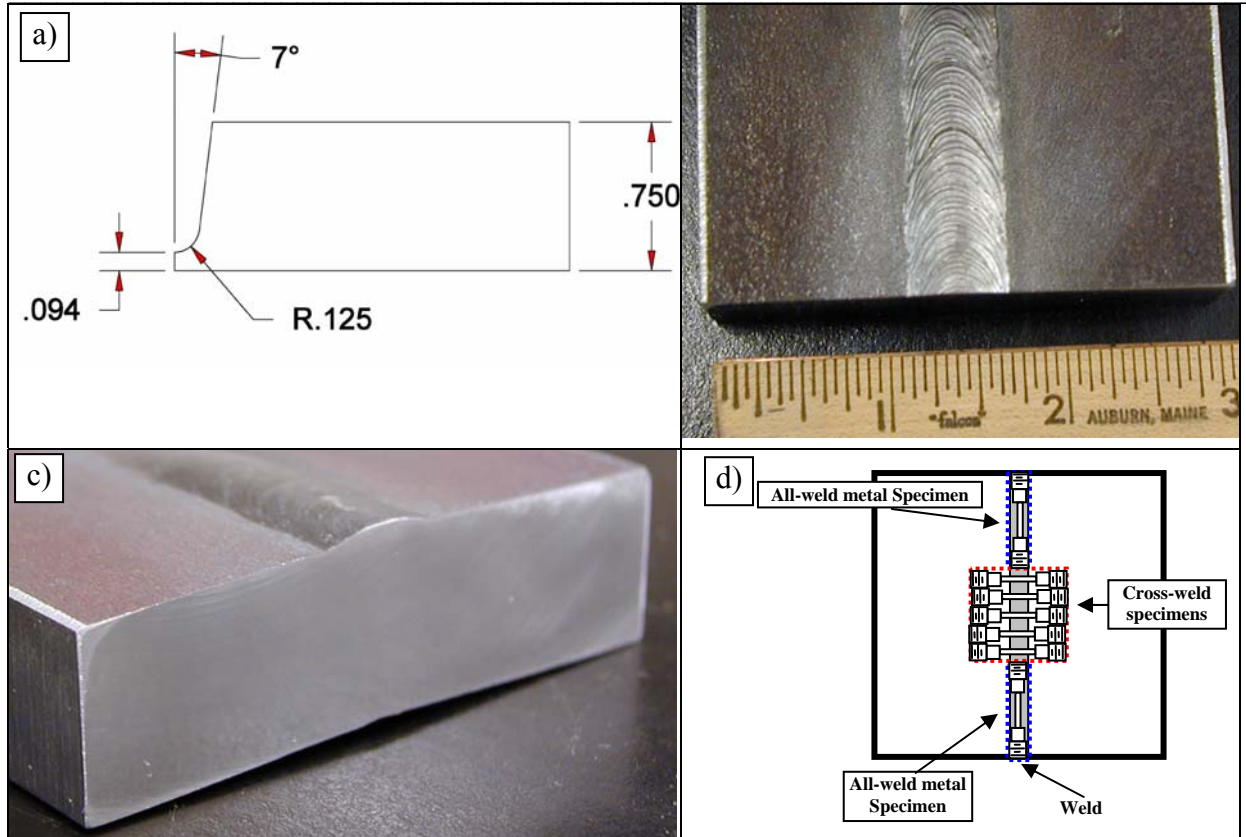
A schematic of the weld joint design is shown in a) while the actual weld bead and a view of the weld cross section are shown in b) and c), respectively and d) a schematic of creep sample orientation/location in the welded plates.
